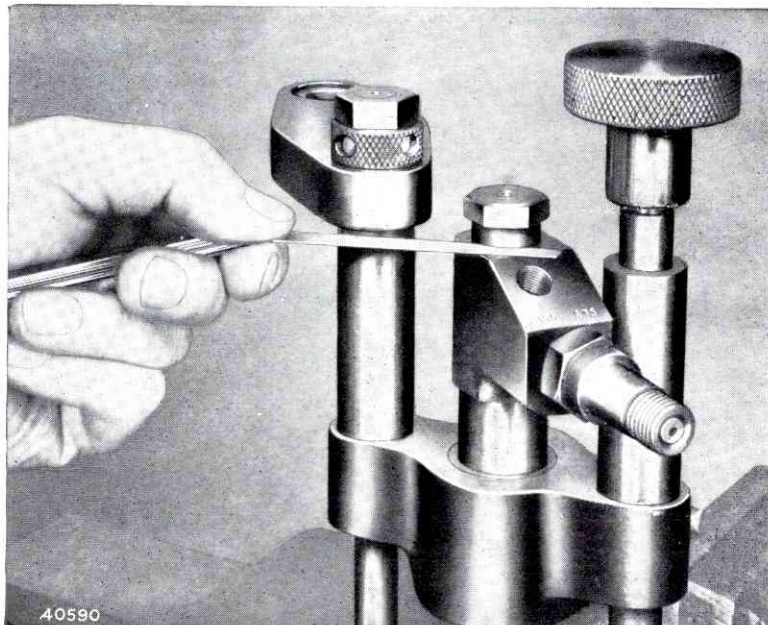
CHECKING THE NEEDLE VALVE LIFT
